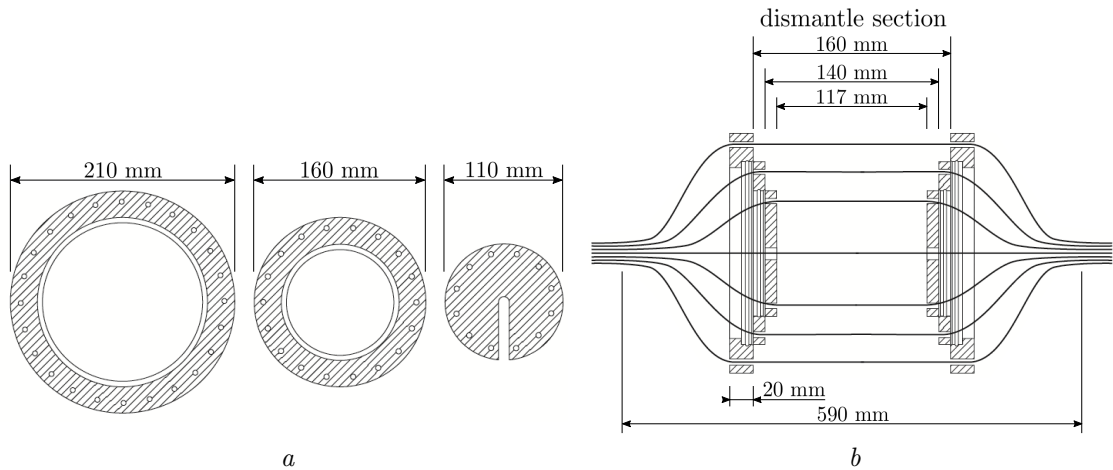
Spacer structures assembly scheme - Front view (a) and Side view (b).
